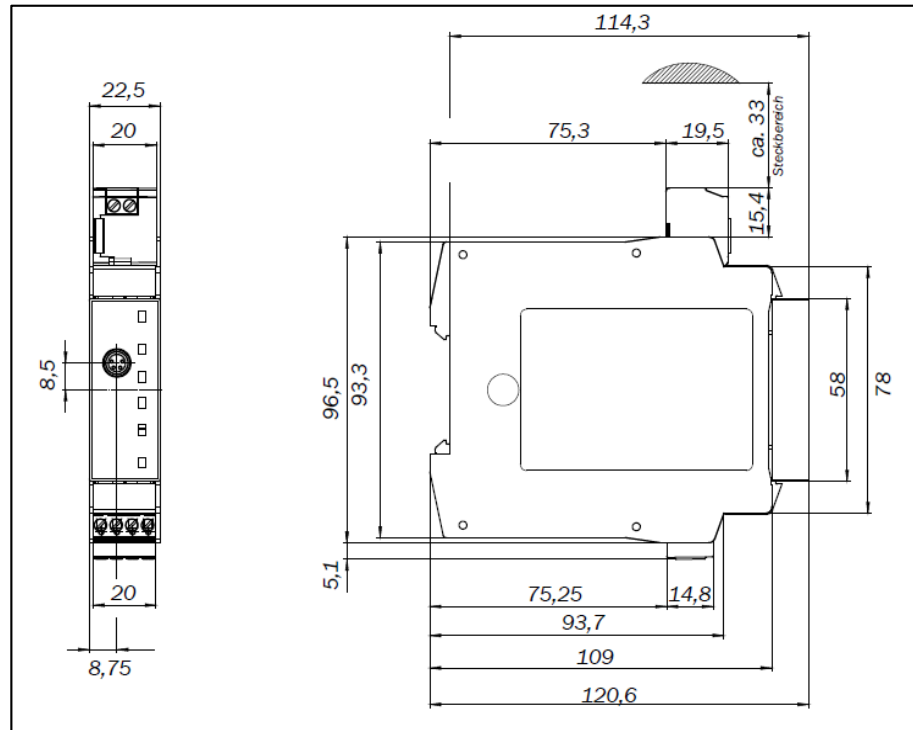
Dimensional drawing of the FX3CPU0 main module with system plug
